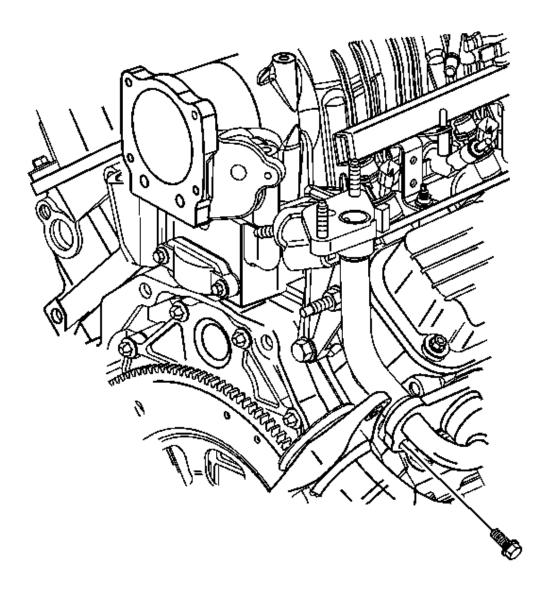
Right Exhaust Manifold Heat Shield & Bolts Courtesy of GENERAL MOTORS CORP.
